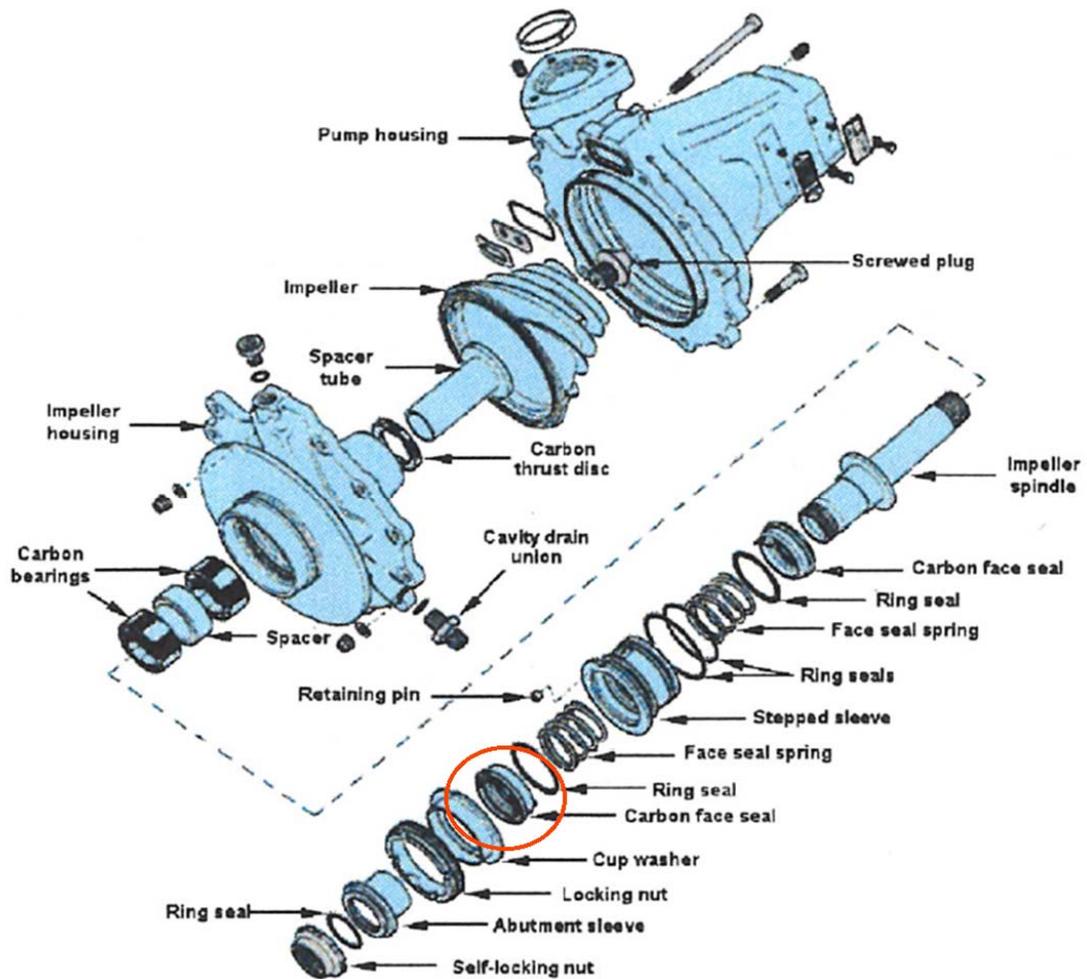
Component setup of the low pressure fuel pump (primary damage in red circle)
